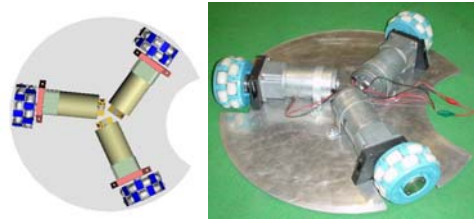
Three-Wheel drive mechanical construction (design and physical)
